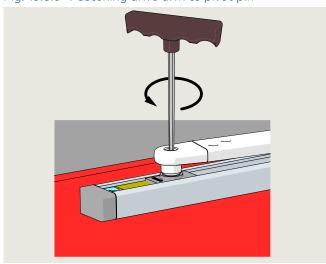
Fastening drive arm with CPD lever to pivot pin
